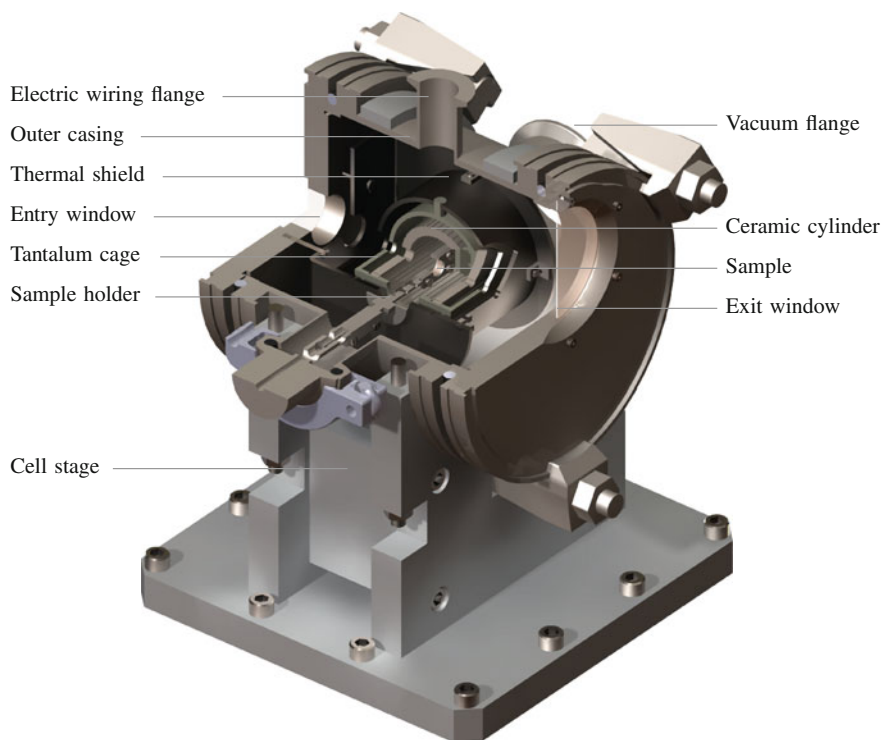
Cross-section CAD view of the constructed experimental cell with furnace
